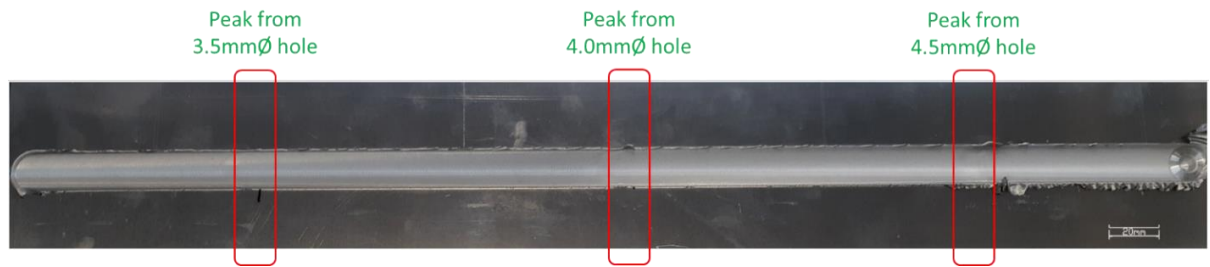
Top surface of the weld D3 performed with the same parameters as D2 with the location of material disruption points caused
